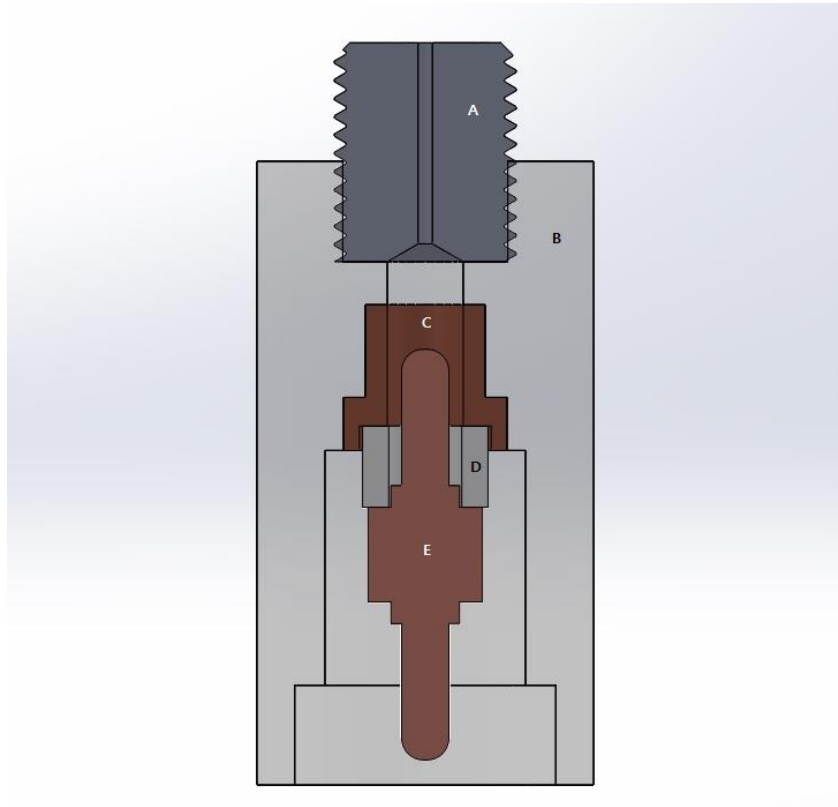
Improved torch head assembly design. A: Anode nozzle, B: Body structure, C: High voltage Tip, D: Flow swirler, E: Cathode.
